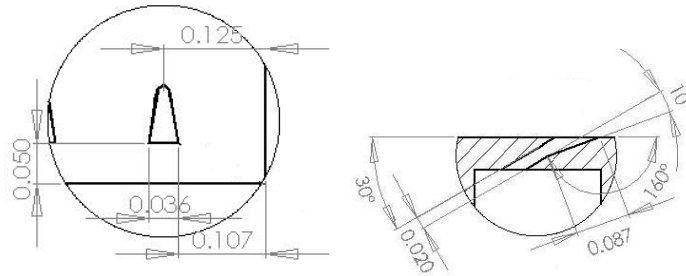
Evans' Fan Shaped Cooling Hole [9]
